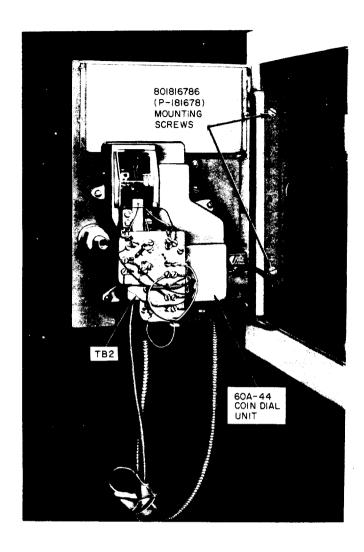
755AM Telephone Set Rear View of Door Assembly
